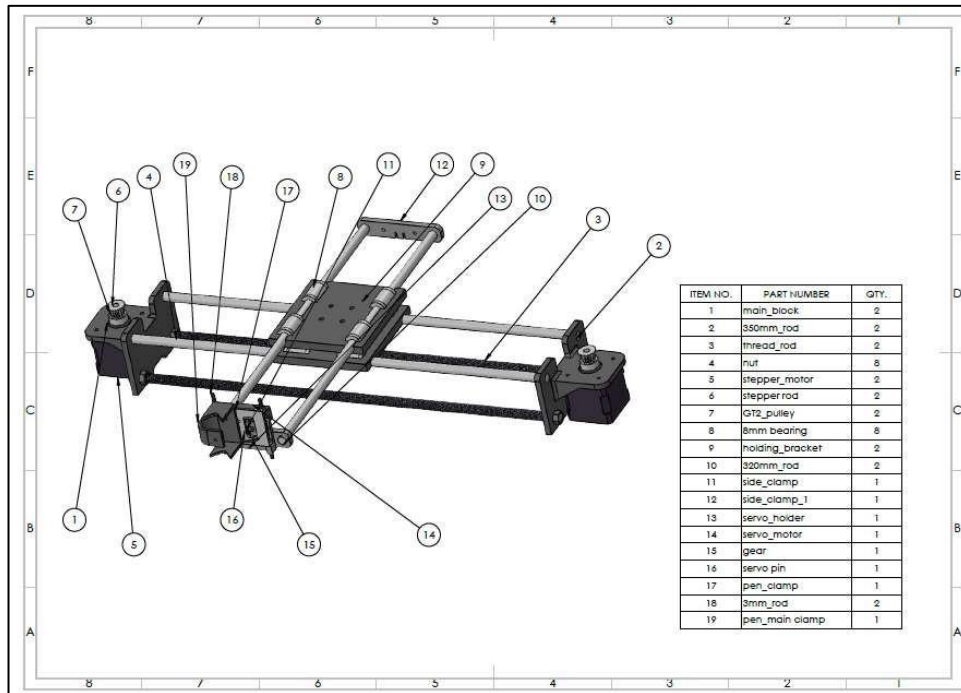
Assembled View (3D) of the Mechanical frame of the Machine
